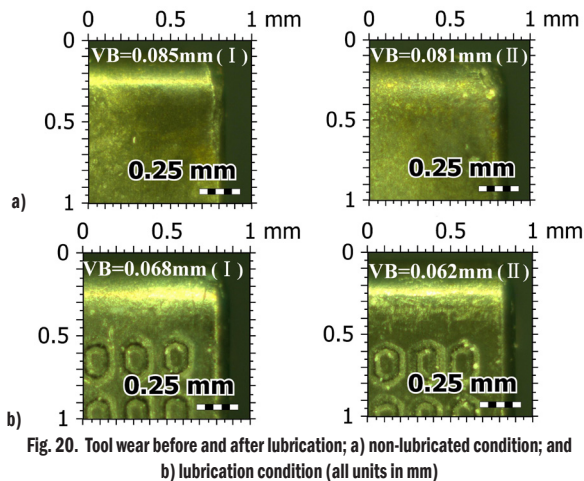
Tool wear before and after lubrication; a) non-lubricated condition; and b) lubrication condition (all units in mm)
